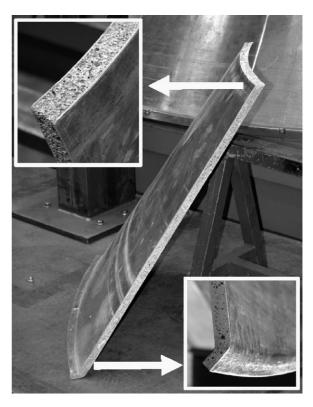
Calibrated cone segment with details of flange and upper edge.
